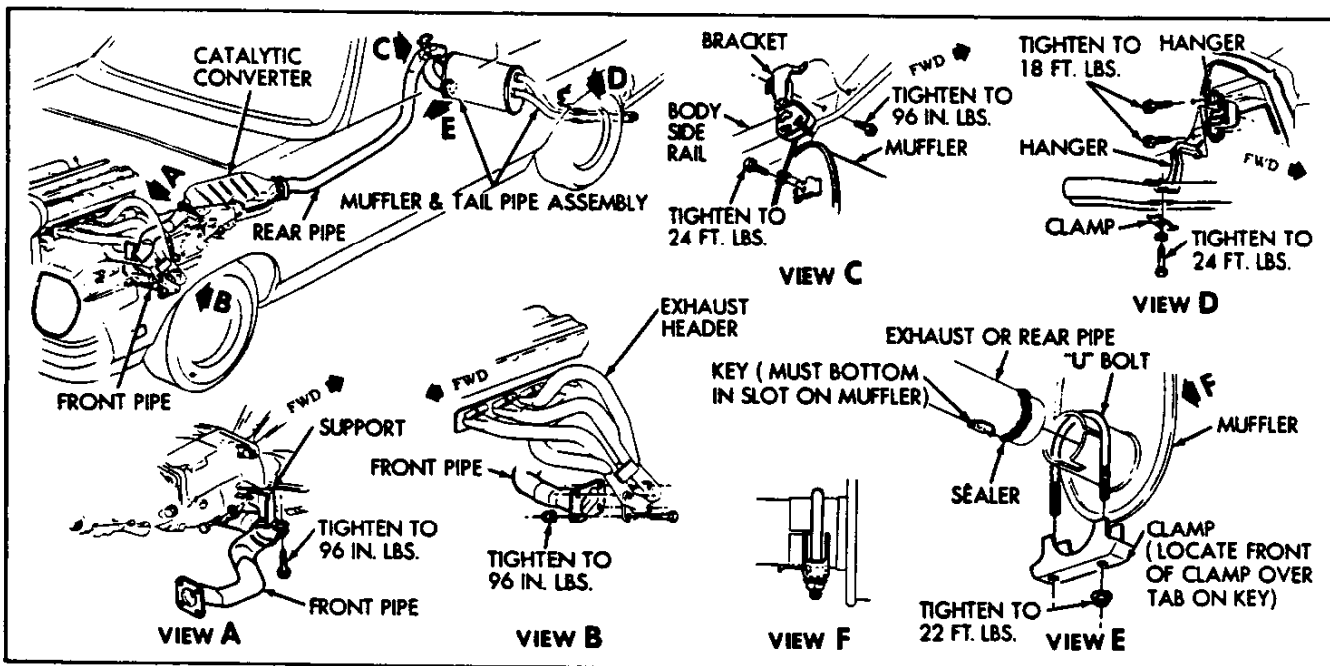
Exhaust Pipe, Muffler and Tail Pipe
